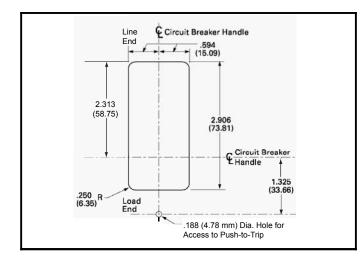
Circuit Breaker Mounting Bolt Drilling Plans
